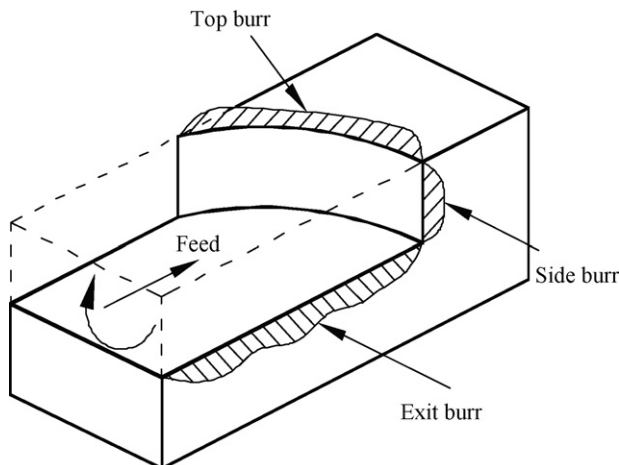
Types of milling burrs classified by burr locations, burr shapes and burr formation mechanisms [14].
